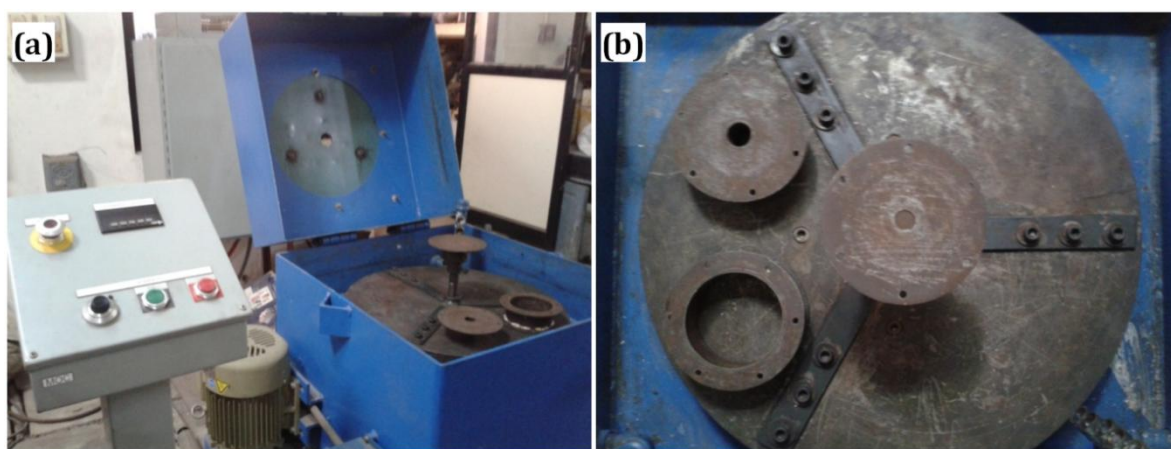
(a) Vertical centrifugal casting machine with (b) Mould used for fabricating Polymer FGM components
